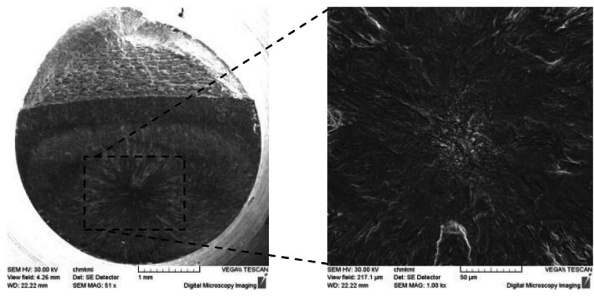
A fracture of the Hardox 450 steel specimen on a macro scale; sub-surface fatigue crack initiation with a distinct crack initiation with a “fish-eye”
